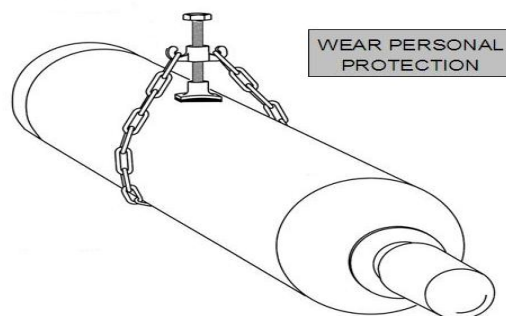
B DEVICE FOR BODY LEAKS (PATCH ASSEMBLY)
